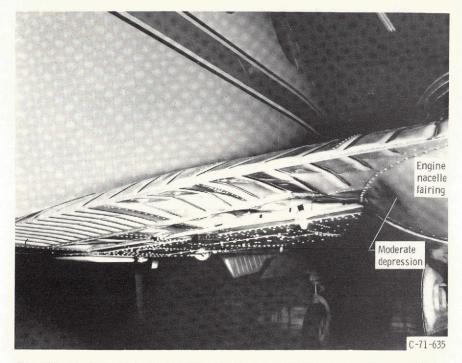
Forward view of damage to lower surface of right inboard flap and engine nacelle fairing.
